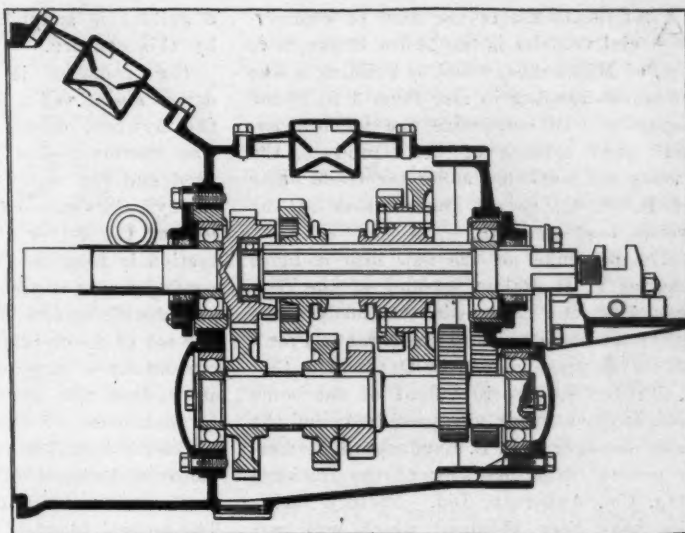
A side sectional view of the Chalmers 36 gearset, showing short, stout shafts on ball bearings and compact construction throughout
